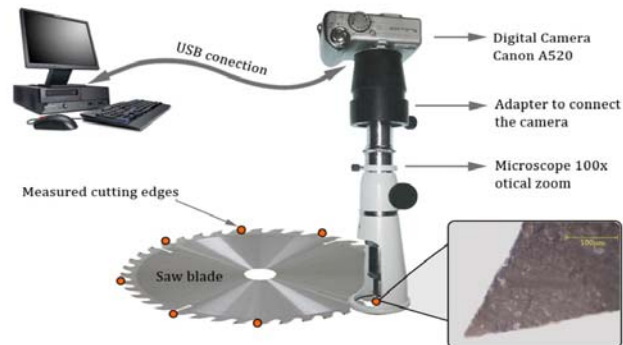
Laboratory equipment for scanning of the cutting wedge tool-wear.
